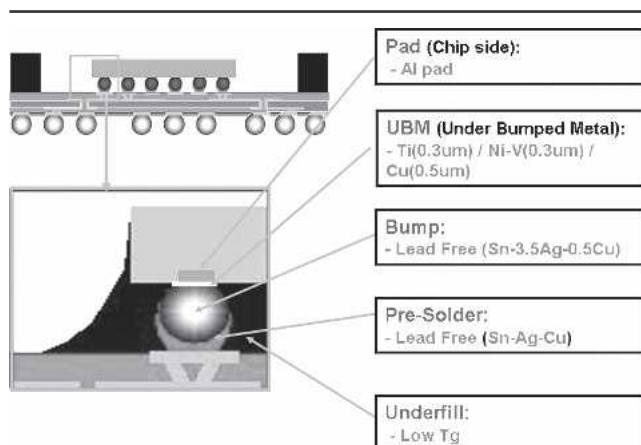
The package type is HFC-BGA with 1,517 solder joints (FC-BGA 1,517). The FC-BGA was soldered onto organic buildup using Sn-3.5Ag-0.5Cu lead-free solder.
